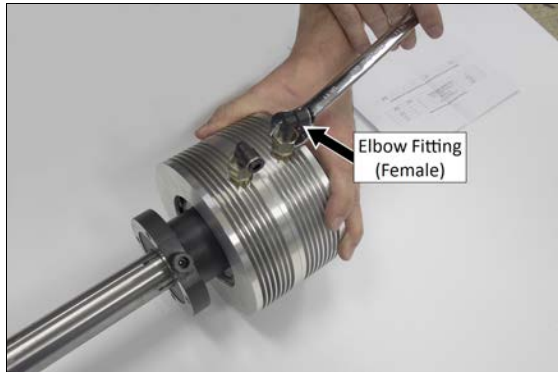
Elbow fittings (female) installed on the NPT reducers.
